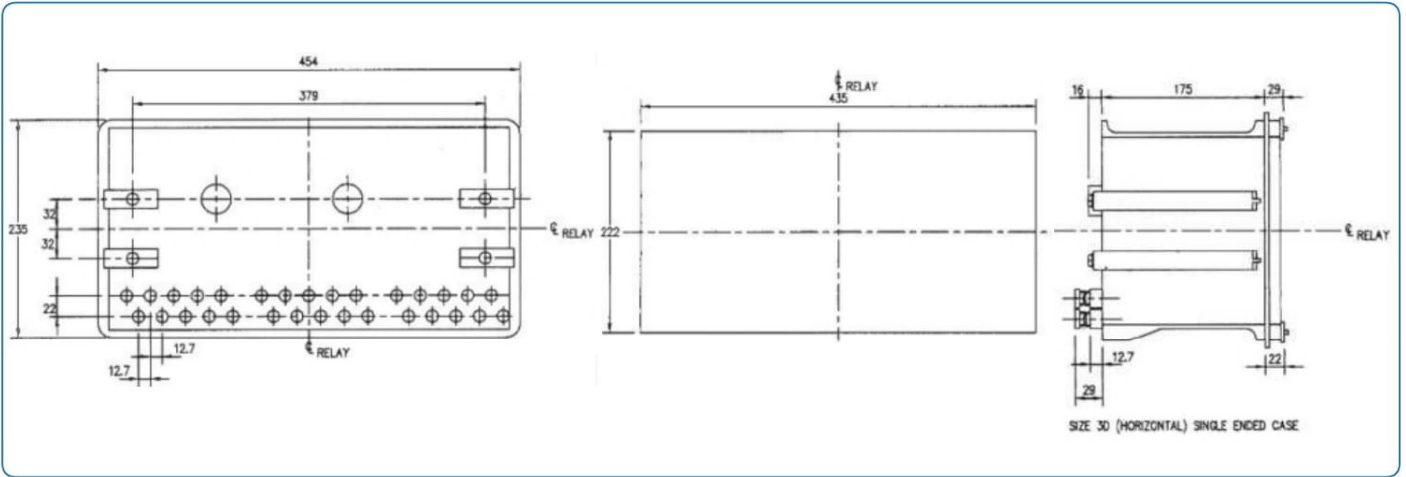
Case and panel cut-out dimensions for case 3D hor drawout (all dimensions in mm)
